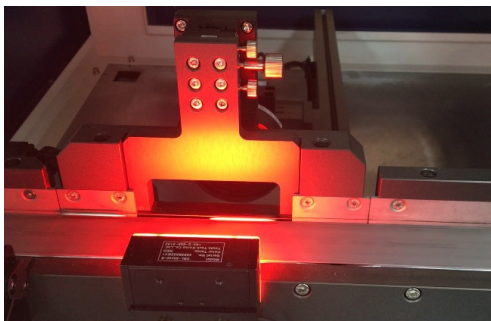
Experimental setup for machine vision to measure the length of rods on a moving conveyor
